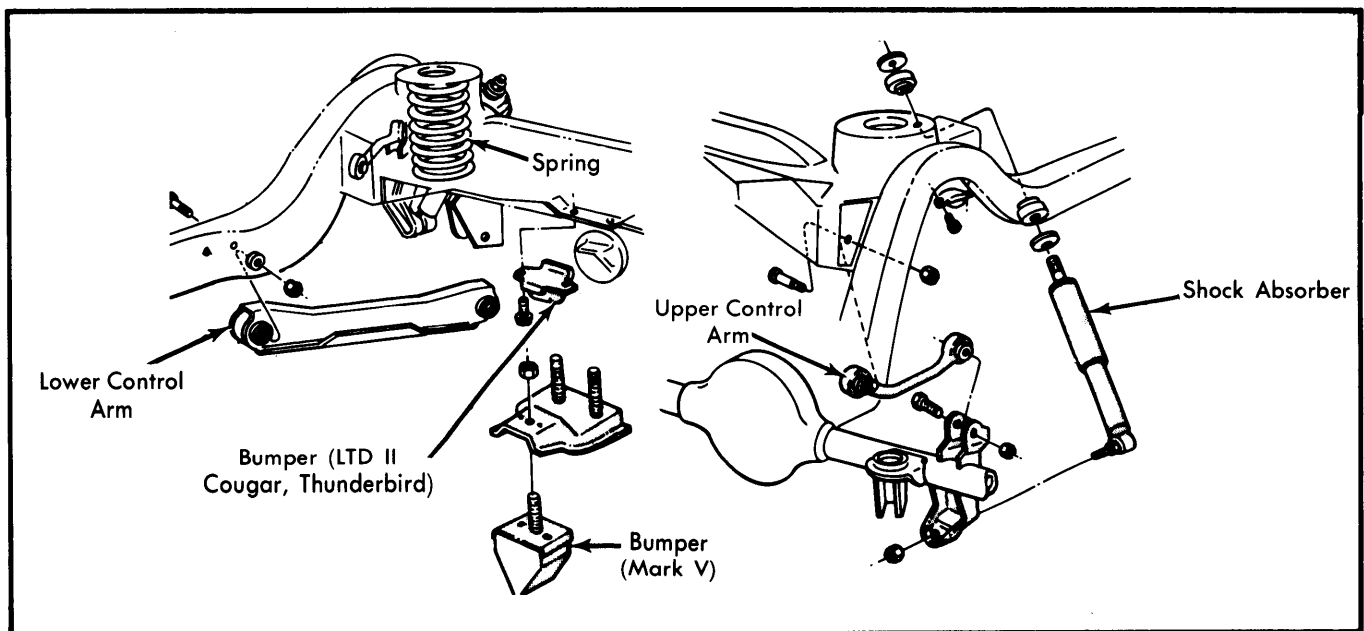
View of Rear Suspension (LTD II, Cougar, Thunderbird & Mark V)
